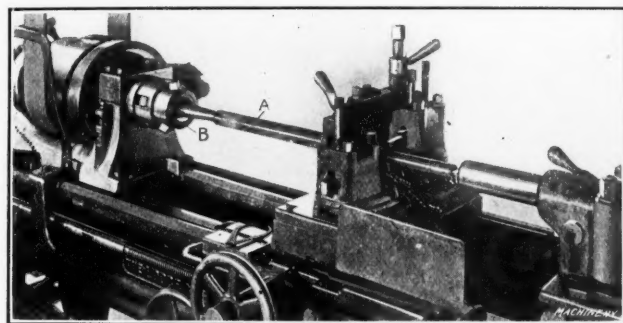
Rough-turning Barrels in a Lodge & Shipley Lathe
